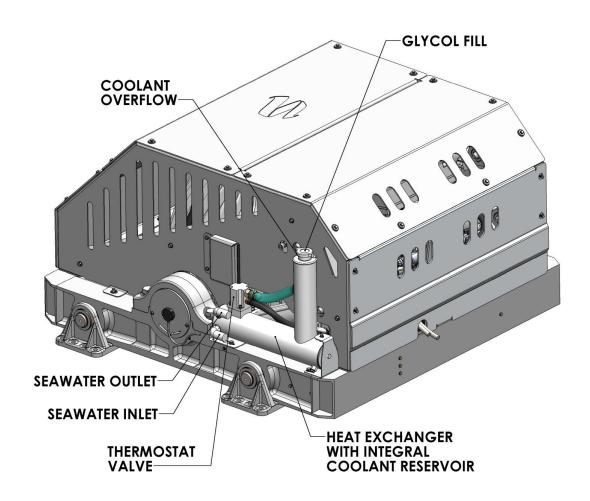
SEAKEEPER 35 COOLING COMPONENTS
